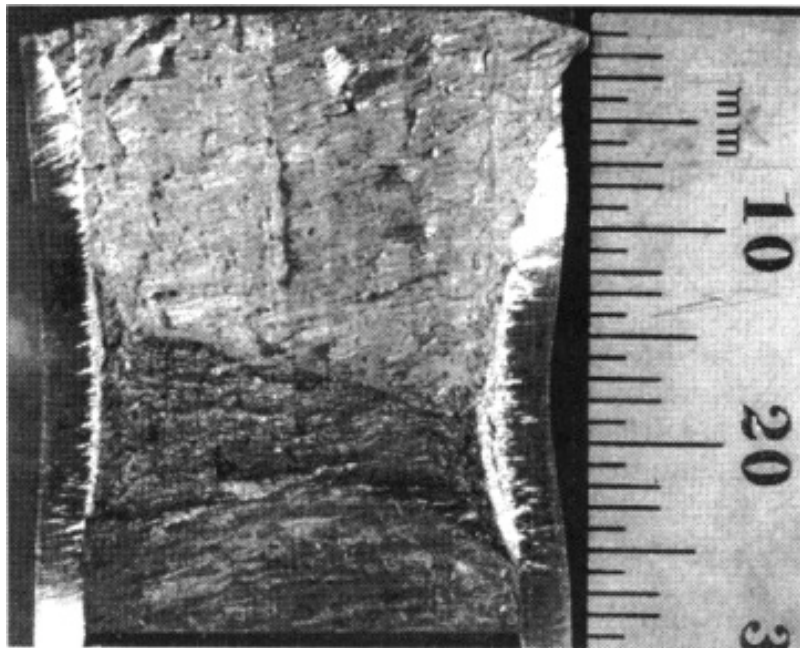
Fracture surface of unaged weld metal PWCE tested at 25°C
